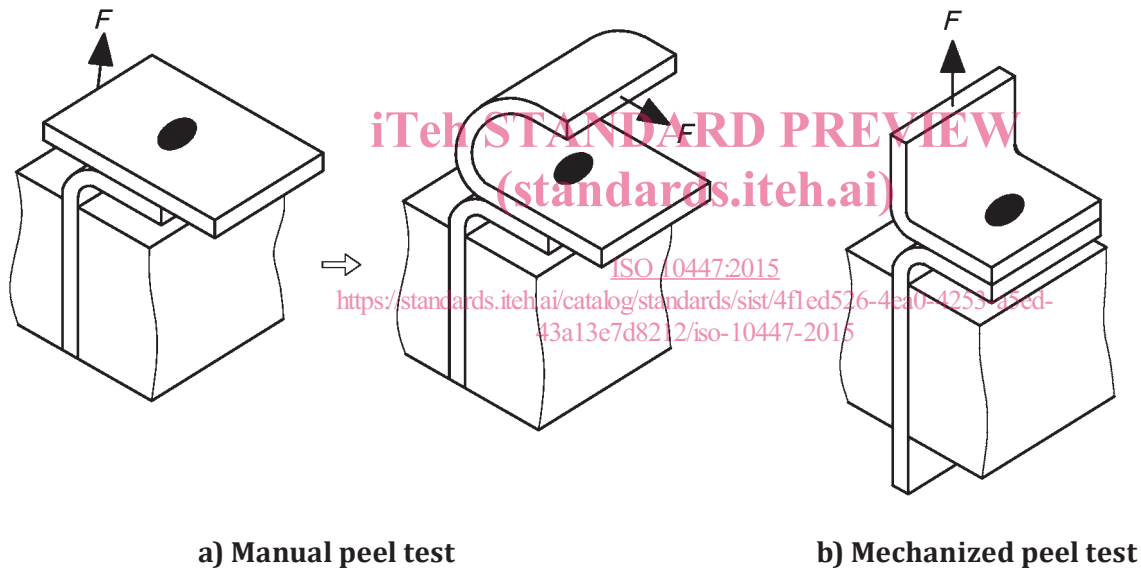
Peel testing of resistance spot and projection welded joints
